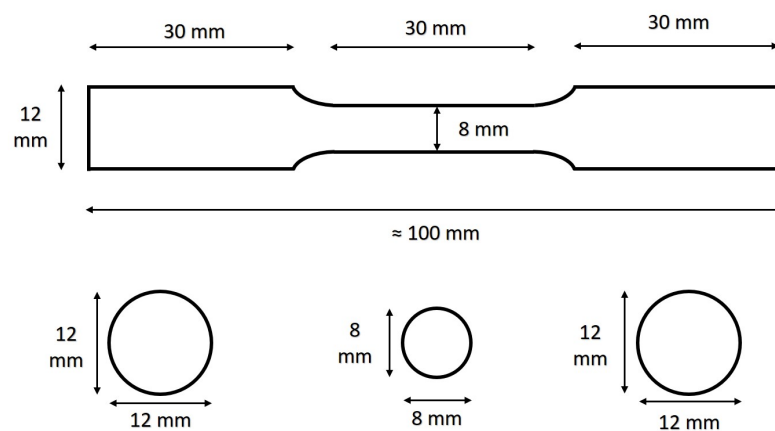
Dimensions of the samples used for tensile testing of the normally extruded rods.
